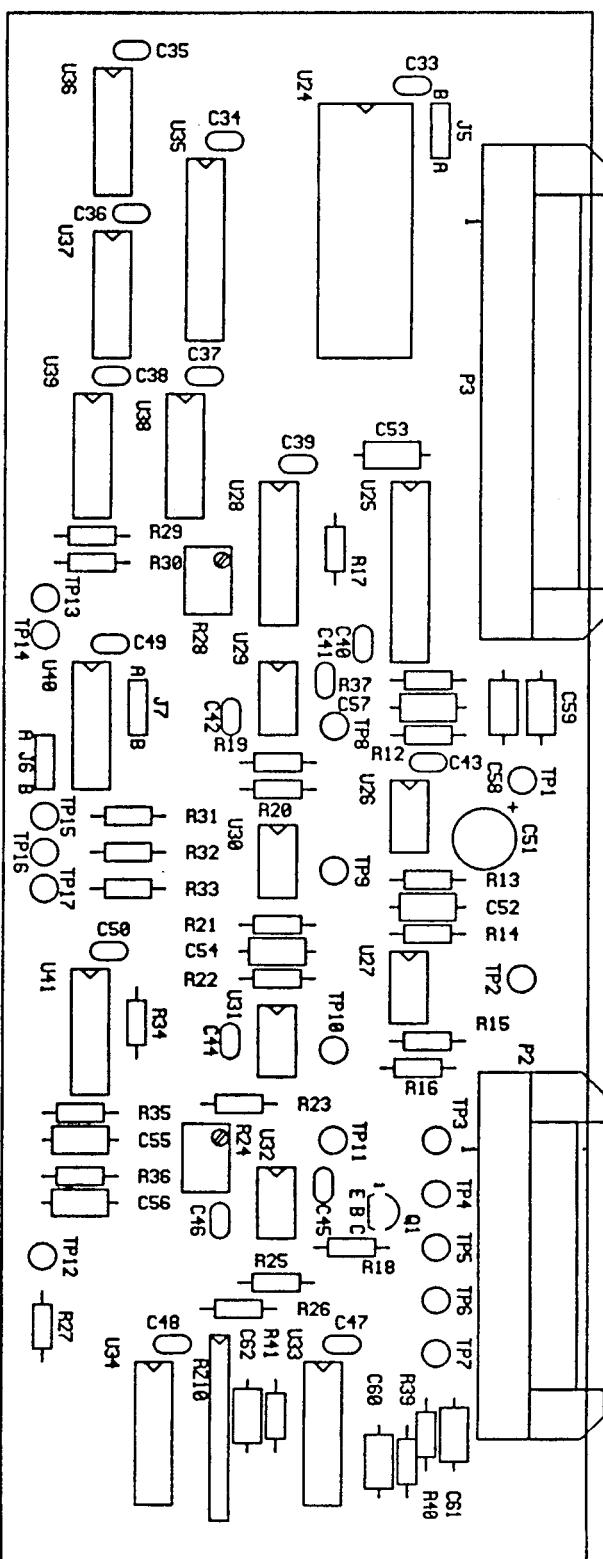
Component locator drawing, RFL 9720 CCM Communications And Control Module piggyback circuit board (Assembly No. 104212; Drawing No. D-104213, Rev. C)
